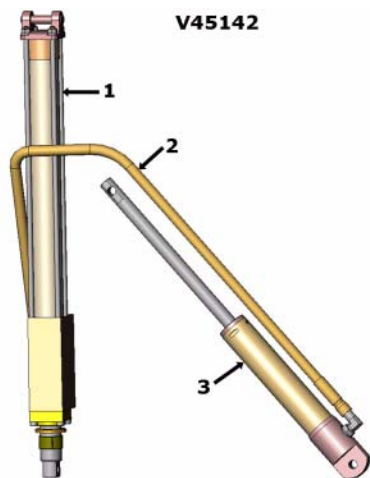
The parts of the hydraulic lift unit (V45142) are: 1 pump, 2 hose and 3 cylinder.
